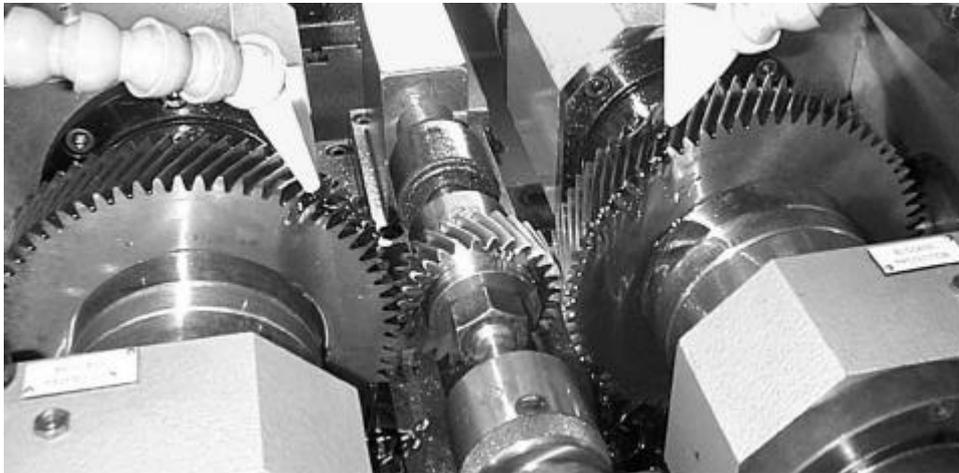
Surface densification of a helical transmission gear using a standard burnishing equipment.
